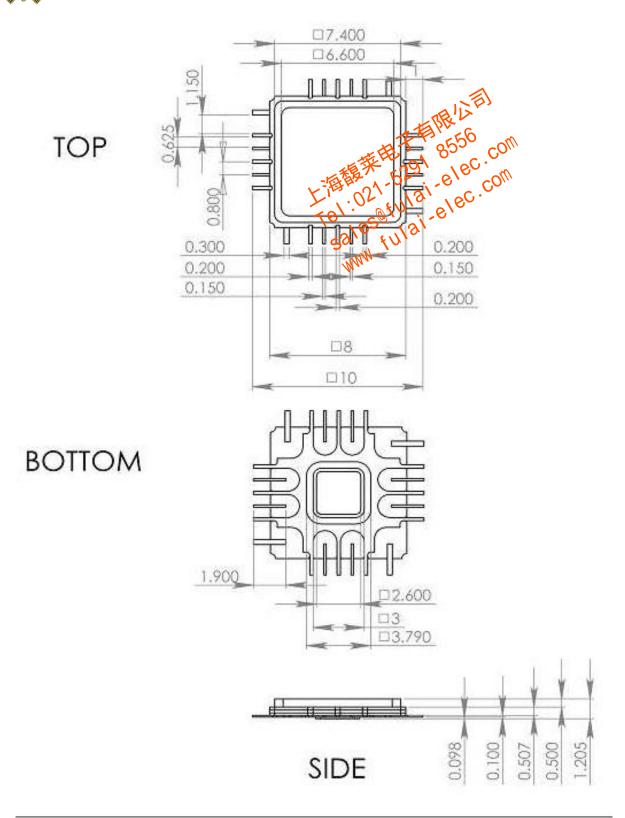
CQFP 24-Pin Package Drawing (All Dimensions in mm)
